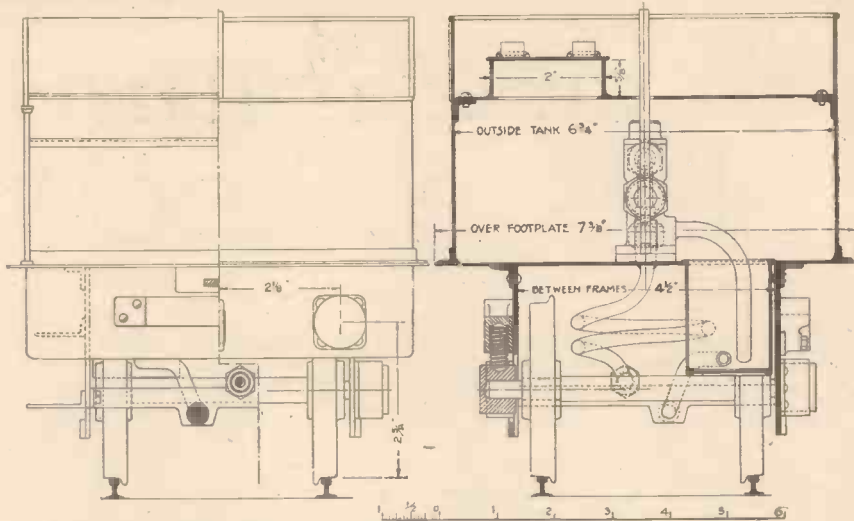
Front and rear half elevations, and cross-section of the tender.
